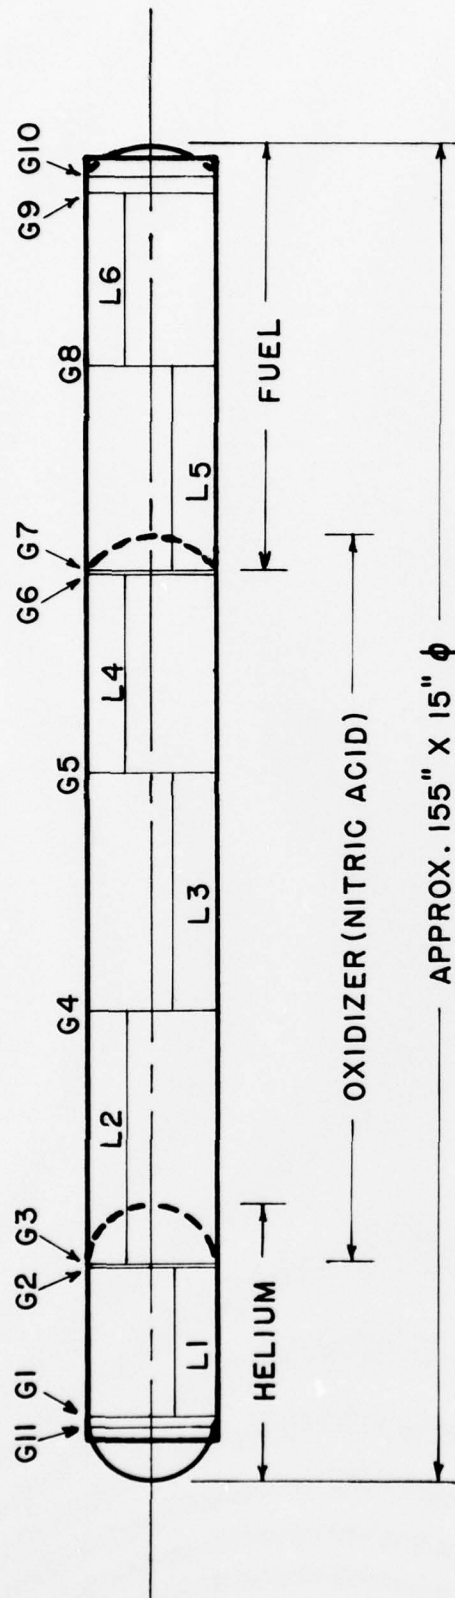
Schematic Drawing of Aerobee - Hi Tank Assembly Showing Locations of Principal Welds
